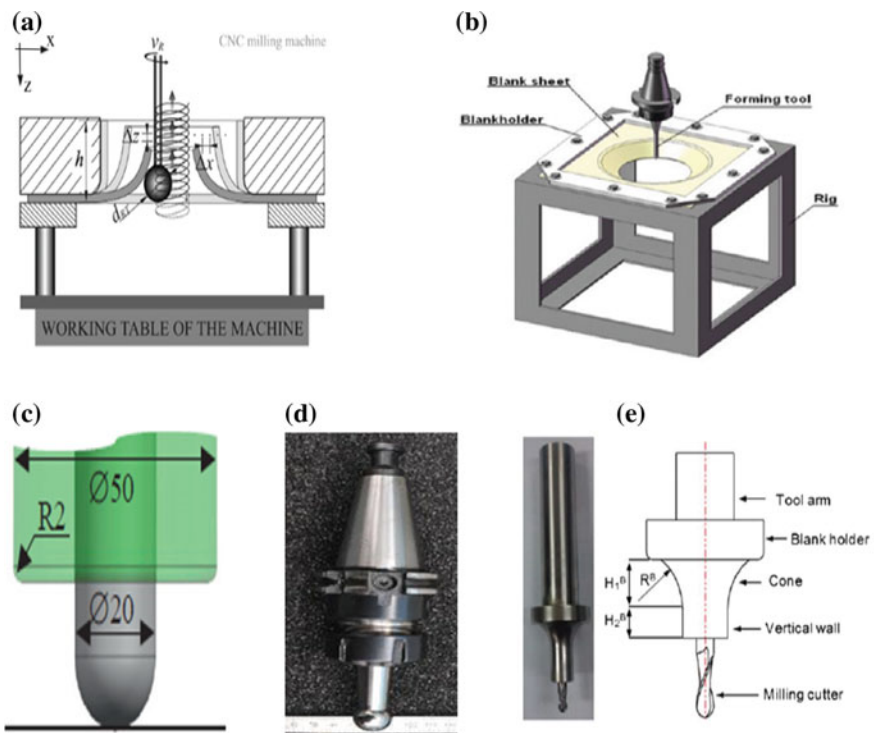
Tools used in hole flanging through single-point incremental forming a Tool with spherical tooltip used in BIHF process set up [2] b Tool used with hemispherical tooltip used in hole flanging through SPIF [3–6, 8, 9, 11, 12] c Tool used in high-speed incremental forming for hole flanging [7] d Tool with ball-nose tool tip [14] e Tool with milling cutter [15]
